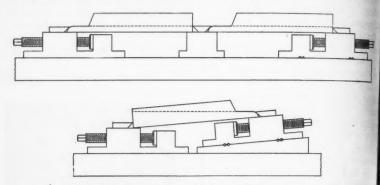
(above) and 2 (below)—General Design of Fixture for Use in Machining
